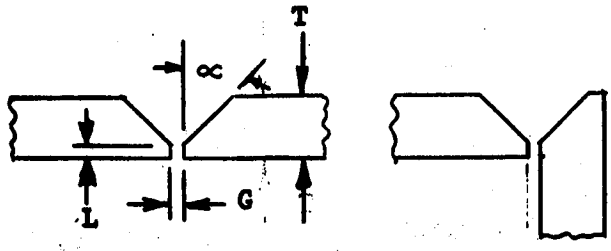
WELD JOINT GROOVE DESIGNS
